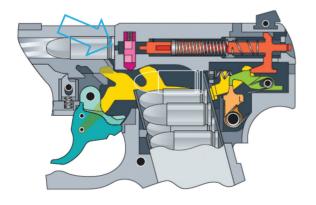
Cross-section of the P99 pistol. The defective area is marked with an arrow.
